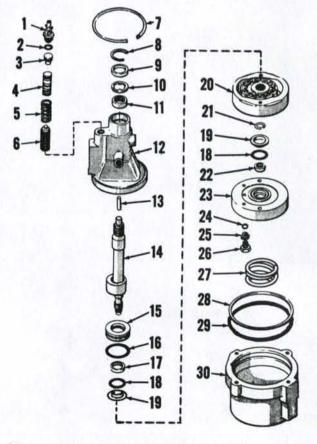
Exploded view of Saginaw Hydramotor steering unit. Also refer to Figs. 11 to 27 for photos showing disassembly and reassembly techniques.
